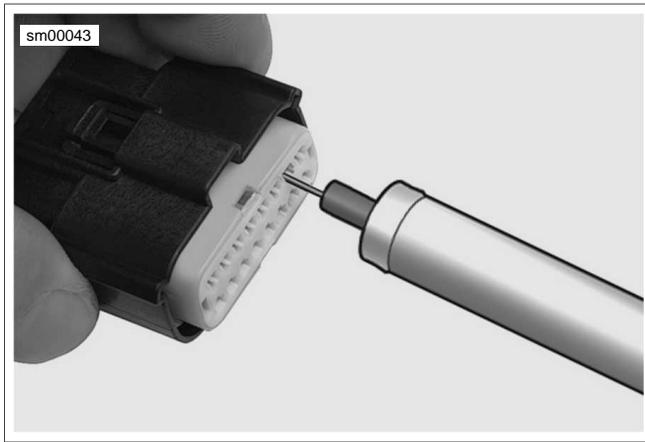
Molex Connector: Terminal Remover (HD-48114)
